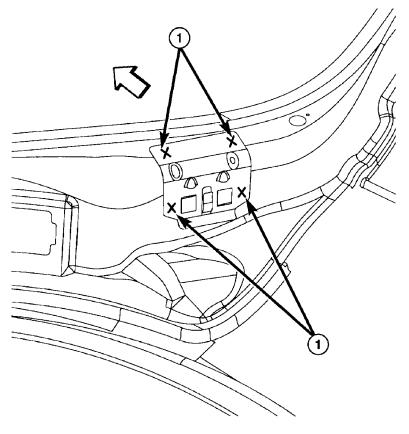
INNER QUARTER PANEL TAIL LAMP REINFORCEMENT TO BODY SIDE APERTURE PANEL 1 - WELDING OF TWO PARTS
